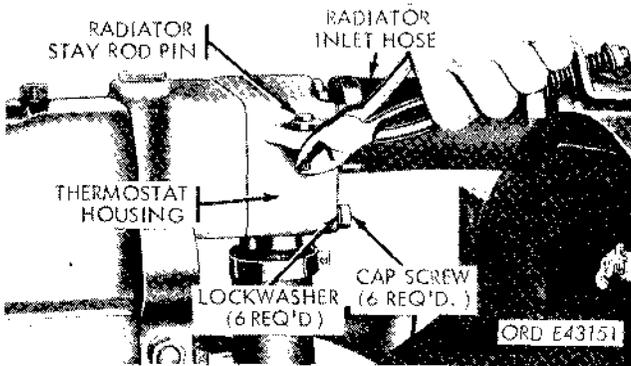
Removing radiator stay rod from thermostat housing—gasoline models.
